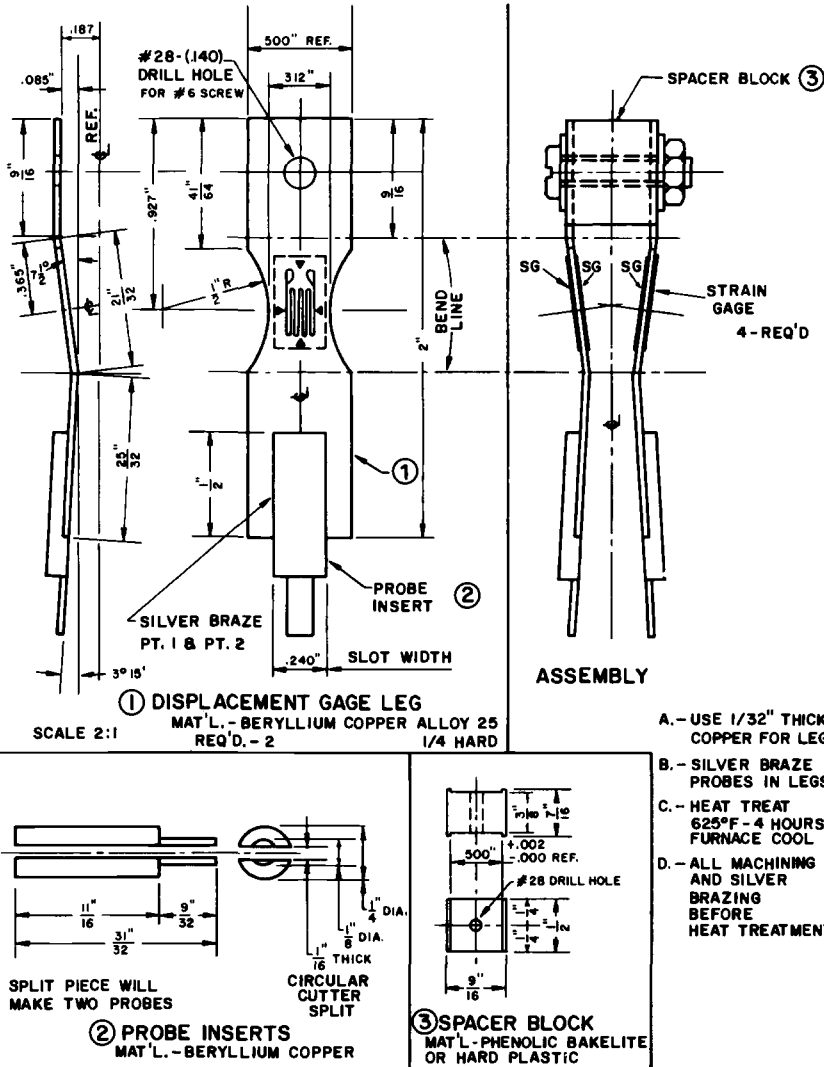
A Detail Drawings of CCT-Type Clip Gage.
